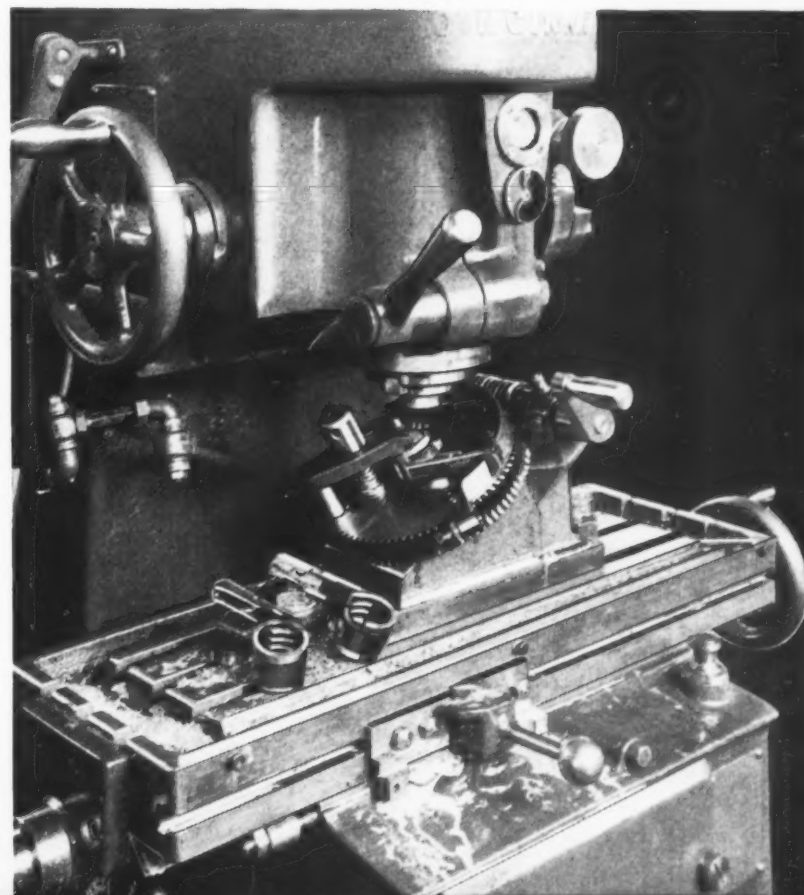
(Right) Set-up Employed in Milling Part Way around the Boss on Nut Barrels at a Specified Angle
